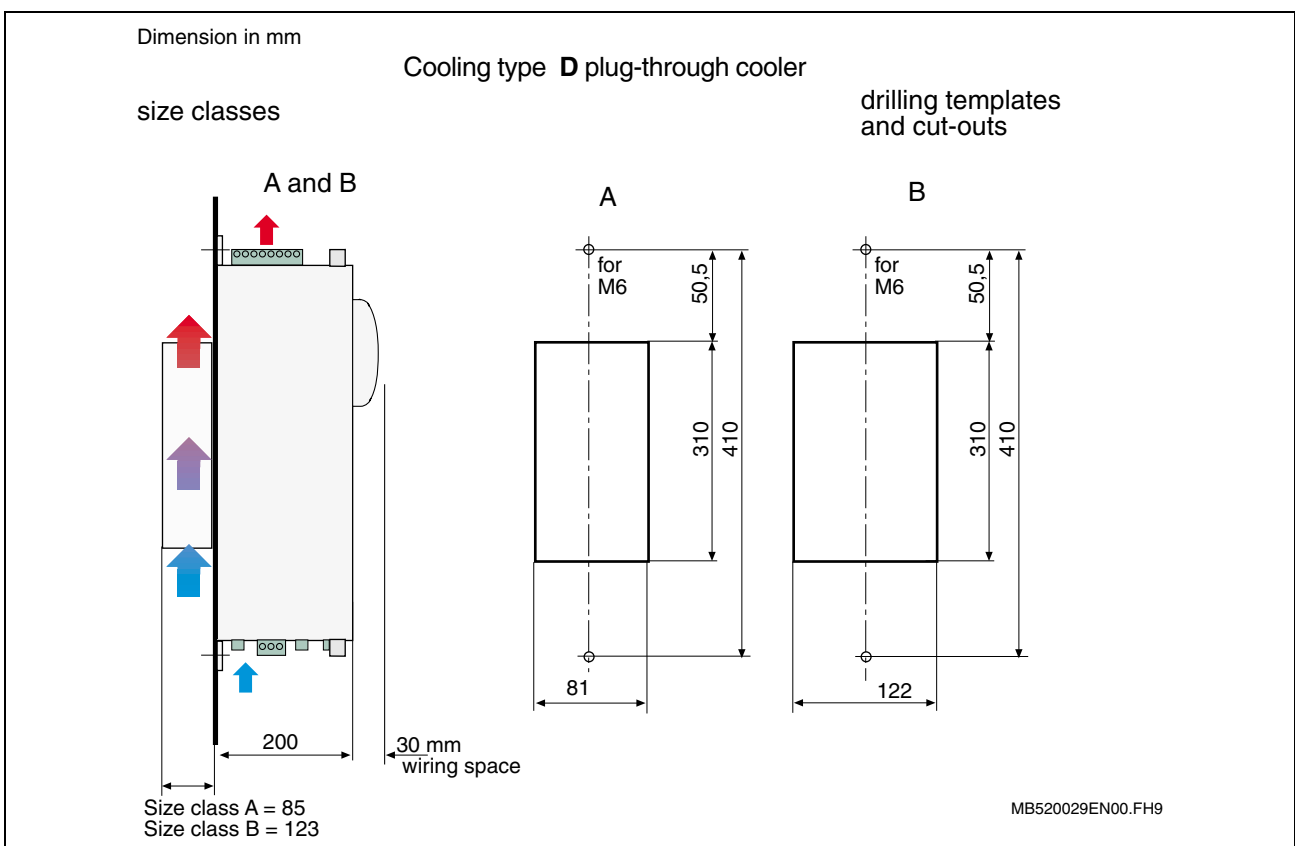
Dimension Drawings for Cooling Type D Size Classes A - B
